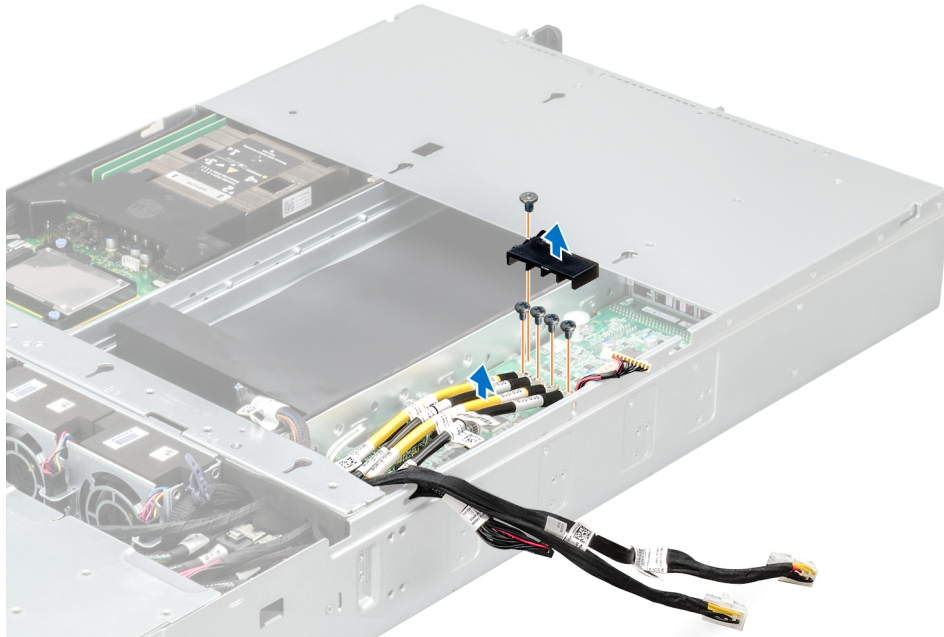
Removing the power cable cover and the power cables screws for PDB 1
